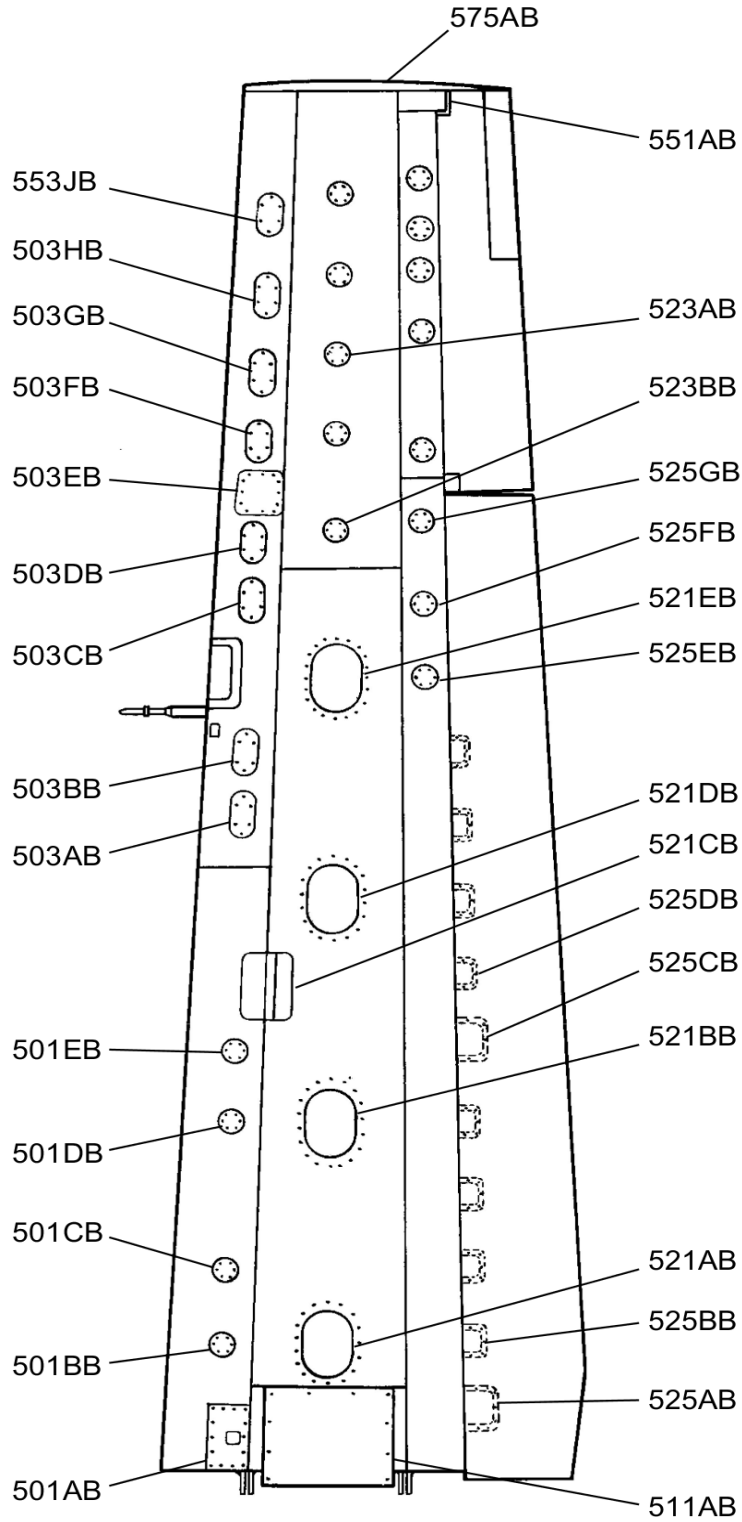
Sheet 1 : Can Bus Fuel Level Sensor
